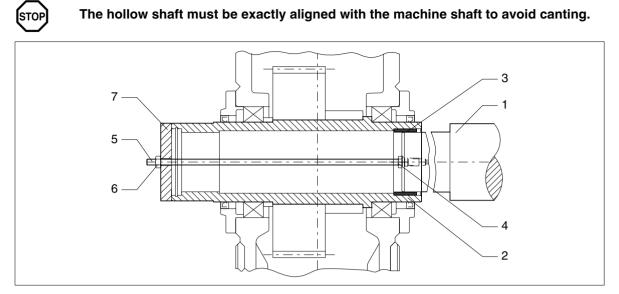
Hollow shaft in shrink-disk design, mounting with DU bush
